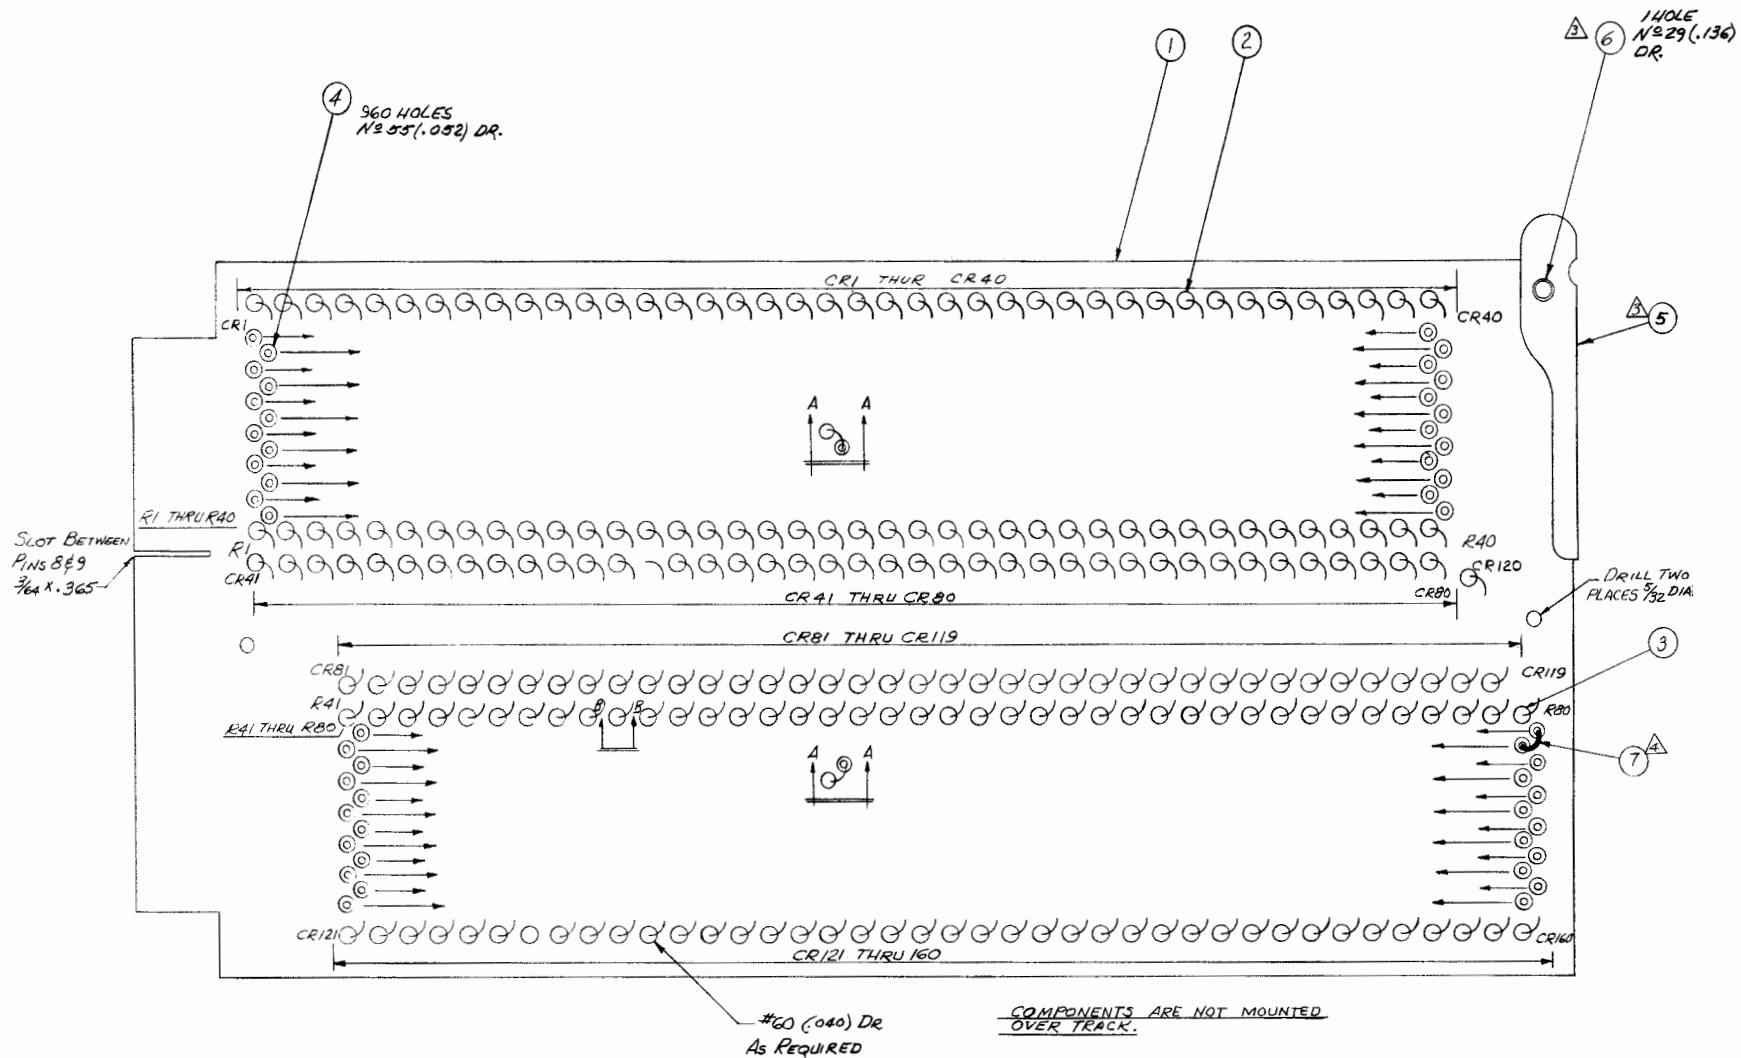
P.C. Board Assembly, Matrix Scanning Circuits (D1166B)
